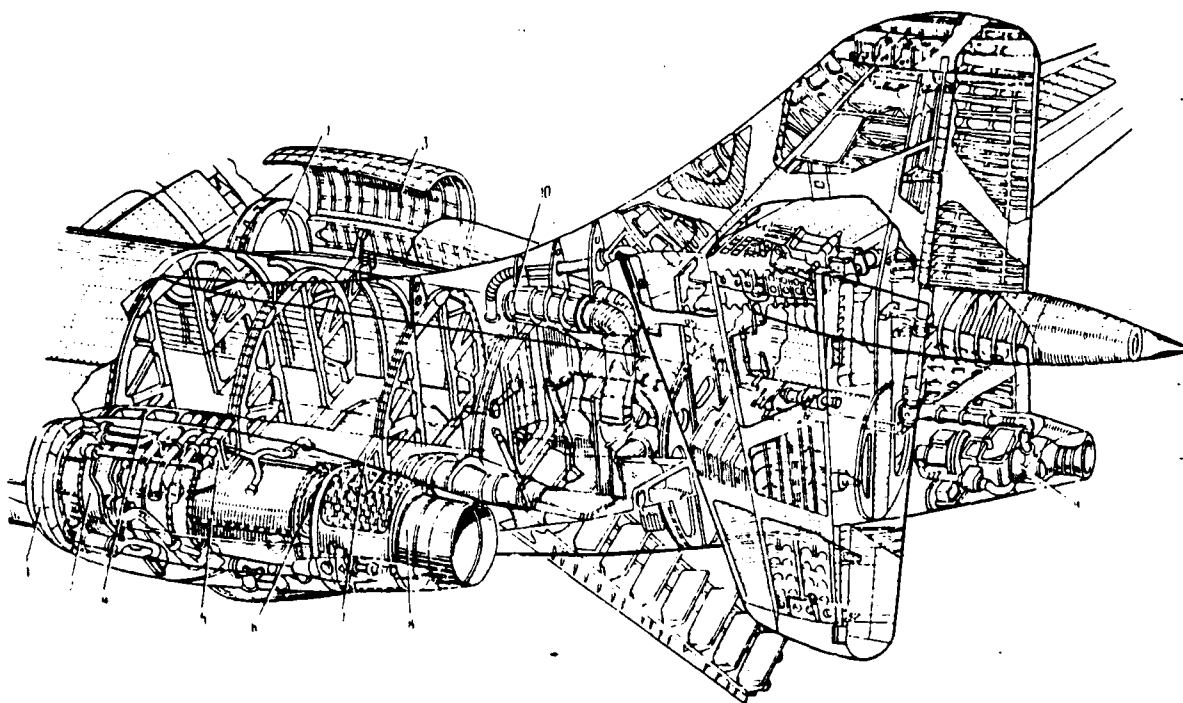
Layout TRDD Pratt-Whitney JT8D on the fuselage of French aircraft "Super Caravelle": 1 - air intake with anti-icing system; 2 - engine; 3 - cowling; 4 - strut of fastening engine; 5 - Main point of attachment of engine; 6 - reverser of thrust; 7 - rear point of attachment of engine; 8 - nozzle; 9 - VSU; 10 - air intake VSU.
